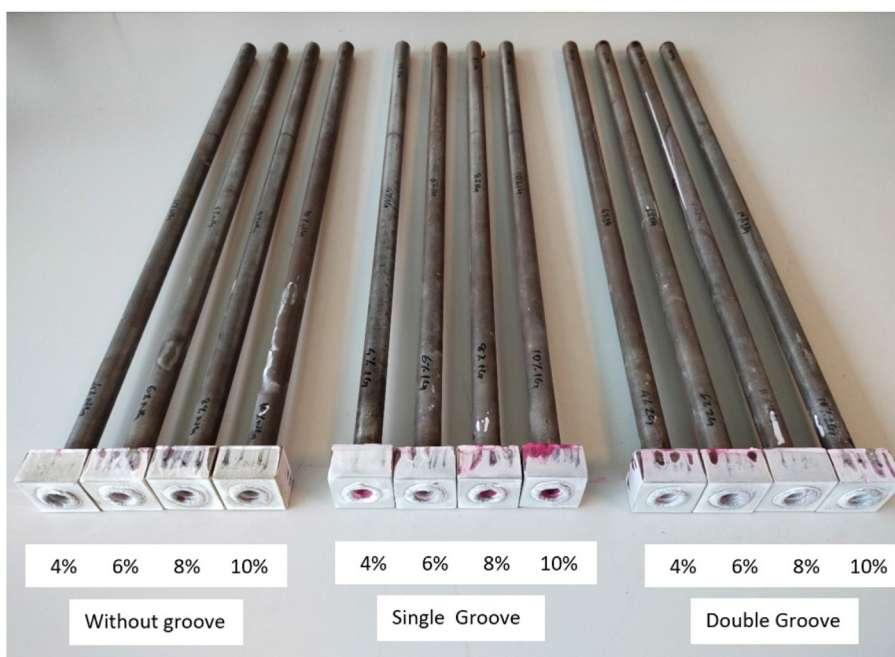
Liquid penetrant testing of hybrid welded-expanded tube-to-tubesheet joints.
